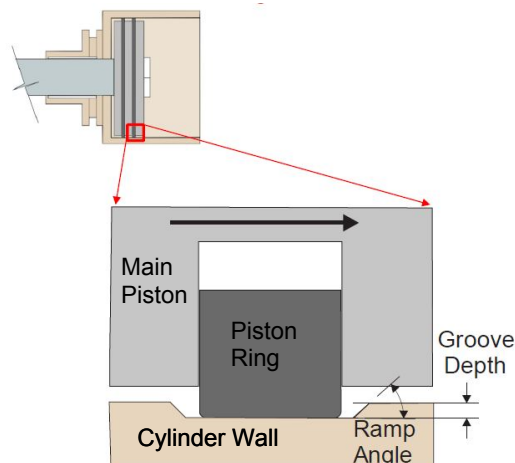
Expanded Diagram of Groove Formed by Piston Ring Fretting
